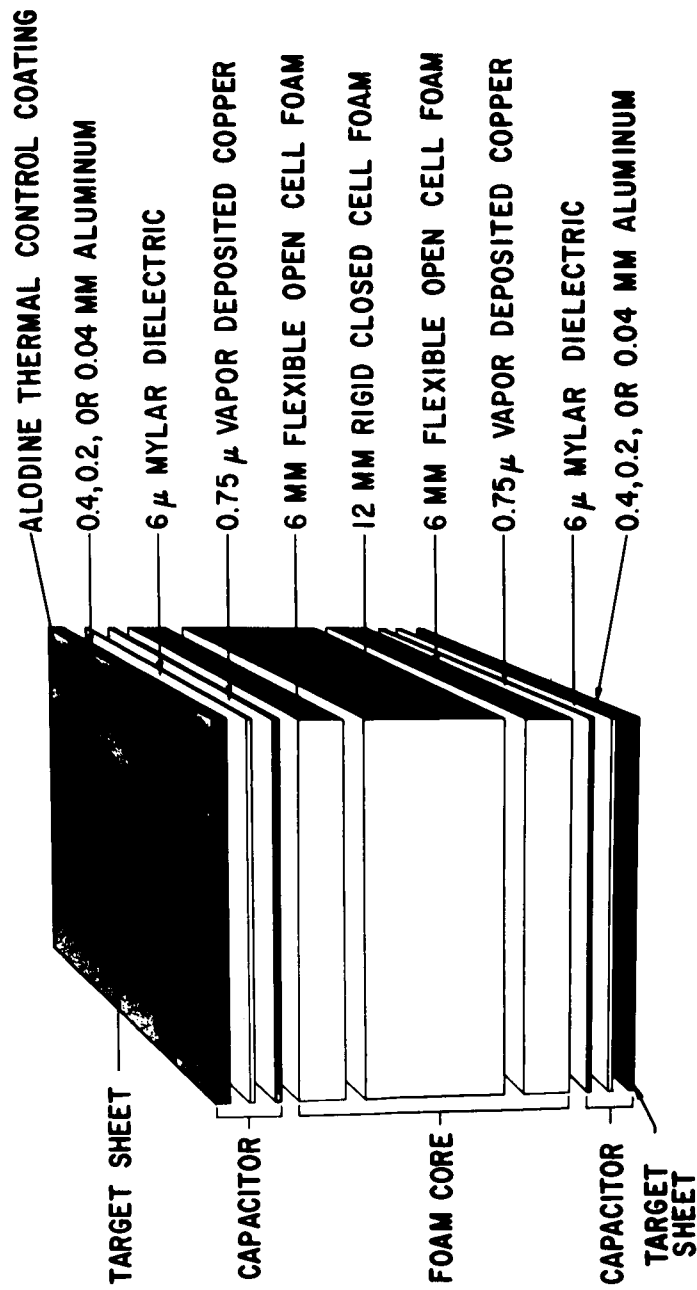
METEOROID SENSOR PANEL (EXPLODED VIEW)
